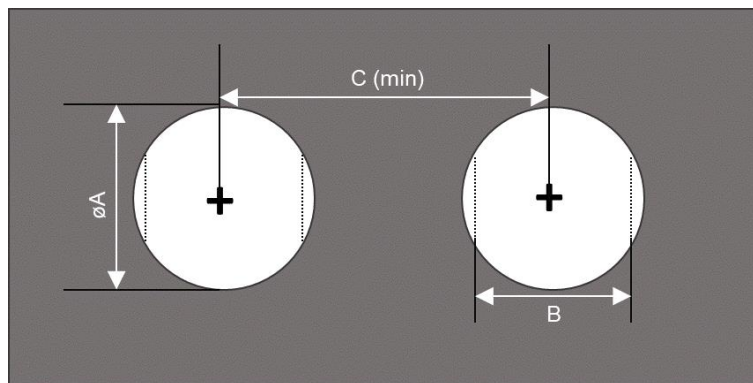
Panel cut-out dimensions for LEMO connector series: attachment by locknuts. Do not scale from this drawing.
